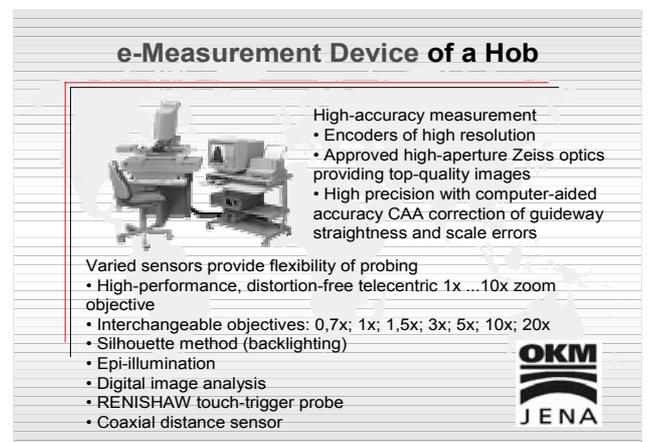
Optical coordinate measurement machine ACCURE with multi sensor system (www.okm-jena.de)
